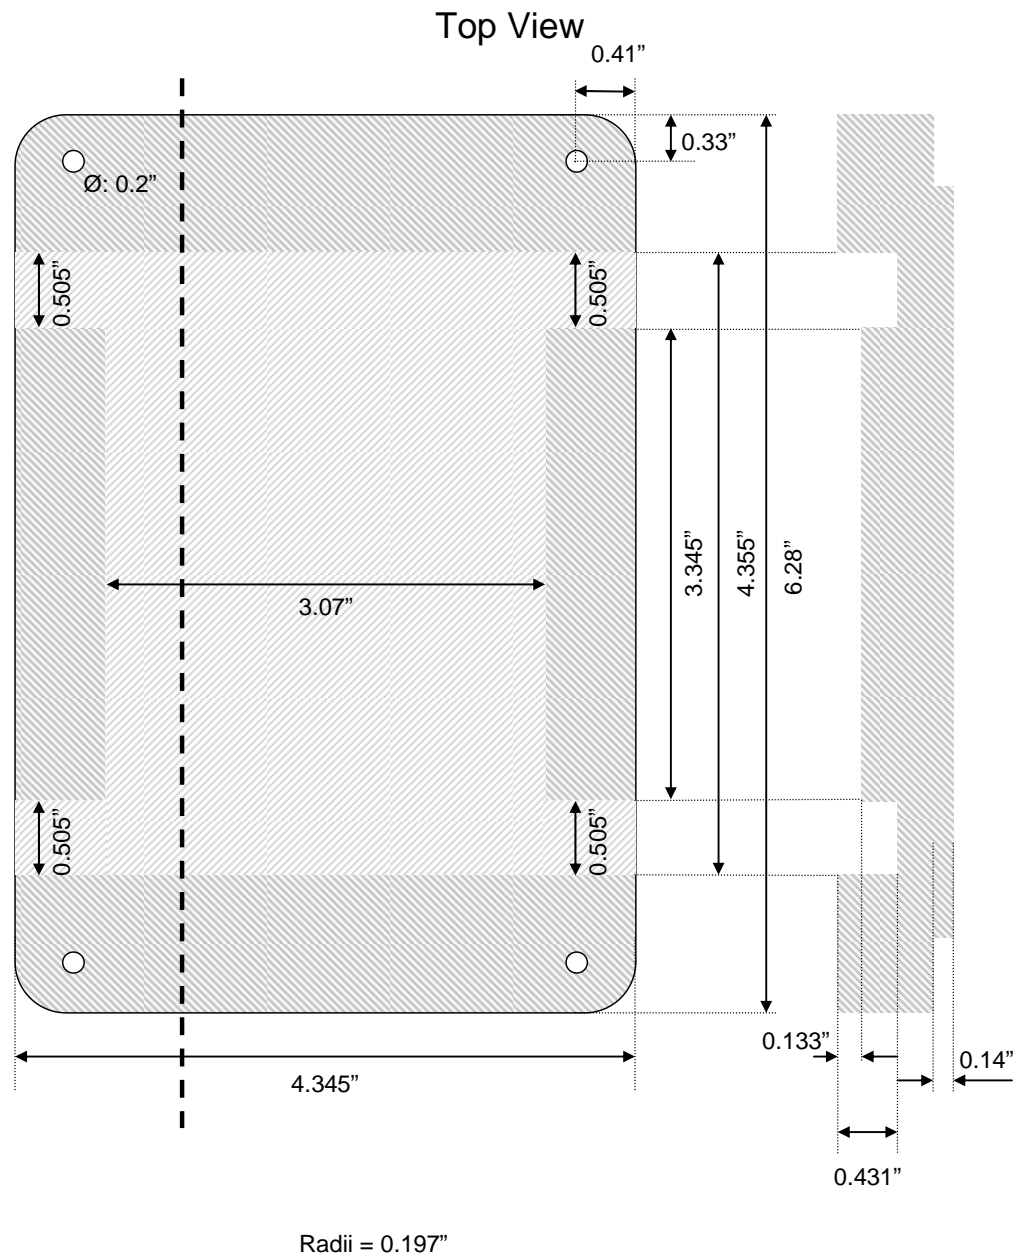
Technical drawing of the insulation plate – top view (dimensions in inch)
